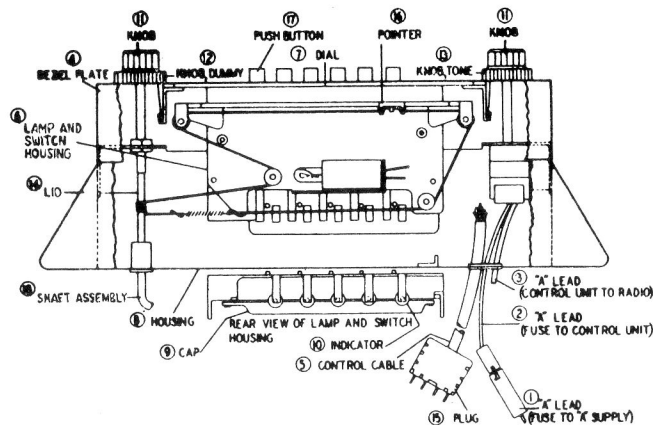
Control Unit C627A (Ford), Showing Location of Parts and Dial-Cord Installation Details
